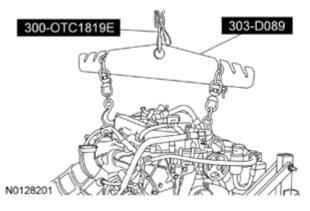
Removing Engine From Engine Stand Using Floor Crane And Spreader Bar Courtesy of FORD MOTOR CO.
